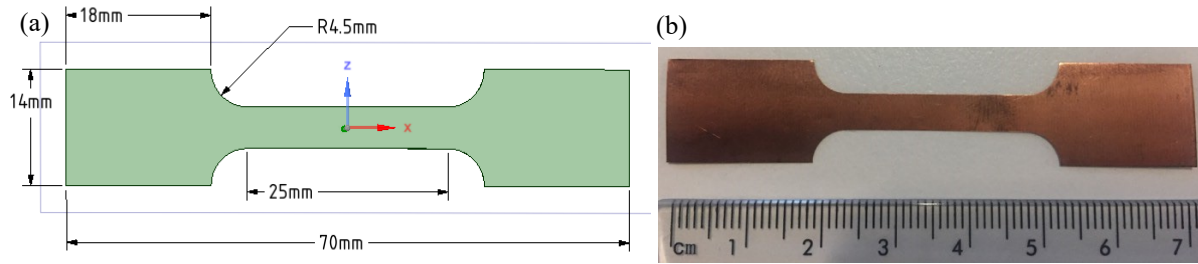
The tensile test specimen. (a) Dimensions of the sample, (b) Real copper specimen
